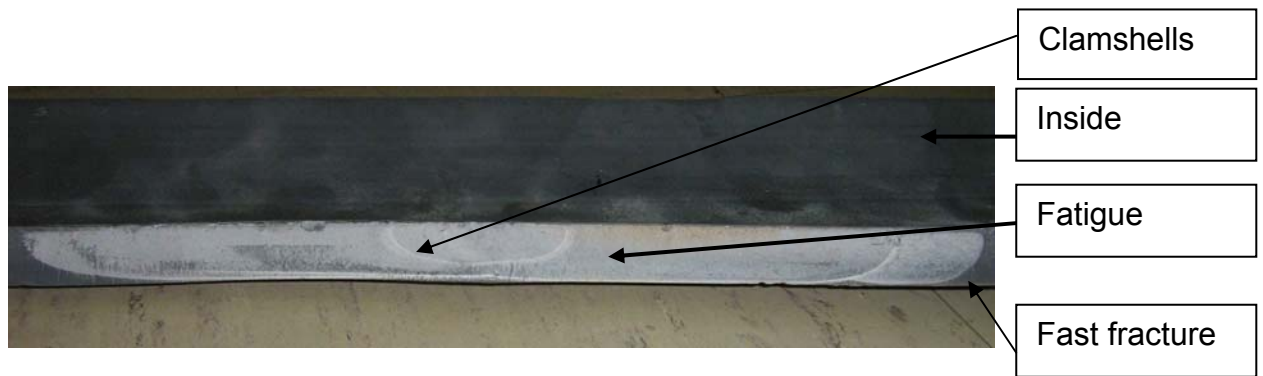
Fracture surface of a failed pipe from the Madinat Jumeirah resort
